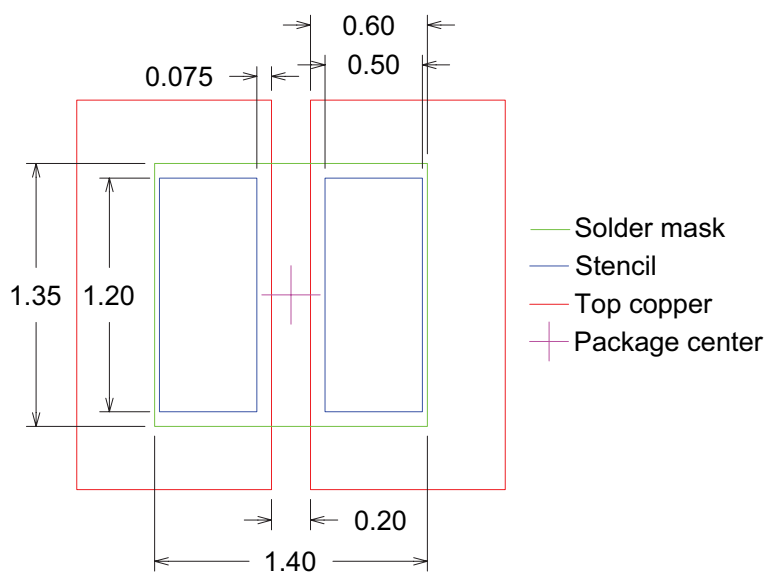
Recommended PCB solder pad layout for LUXEON UV FC2.
